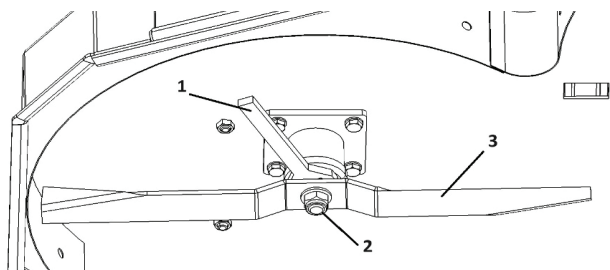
Blades replacement: 1 – wrench, 2 – blade fixing nut, 3 – blade
